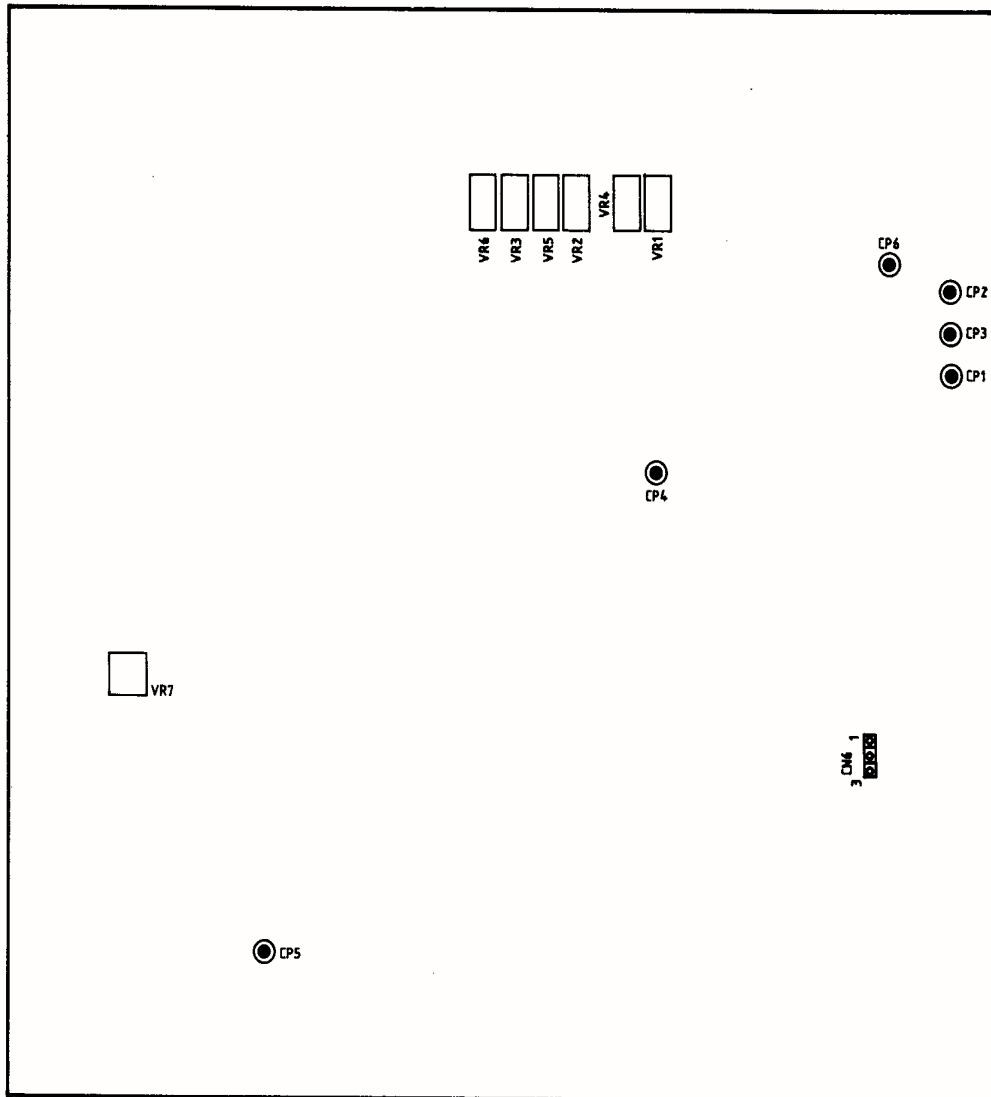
Location of Trimmers and Test Points on Capstan Control PCB
